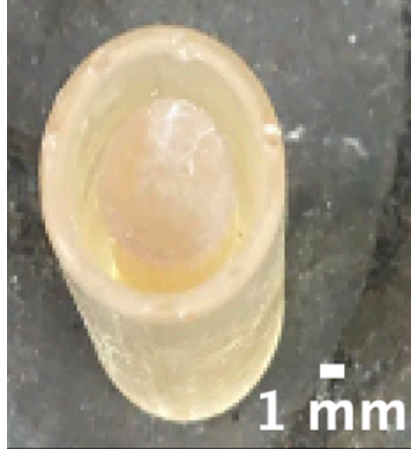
Finished movable mold after printing with Formlabs standard High-Temperature V2 resin and post-processing. The outer and inner cylinder are shown together to demonstrate how the mold will be used.
